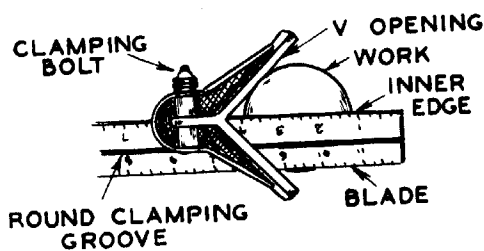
SCRIBING A CENTER LINE USING A CENTER HEAD
